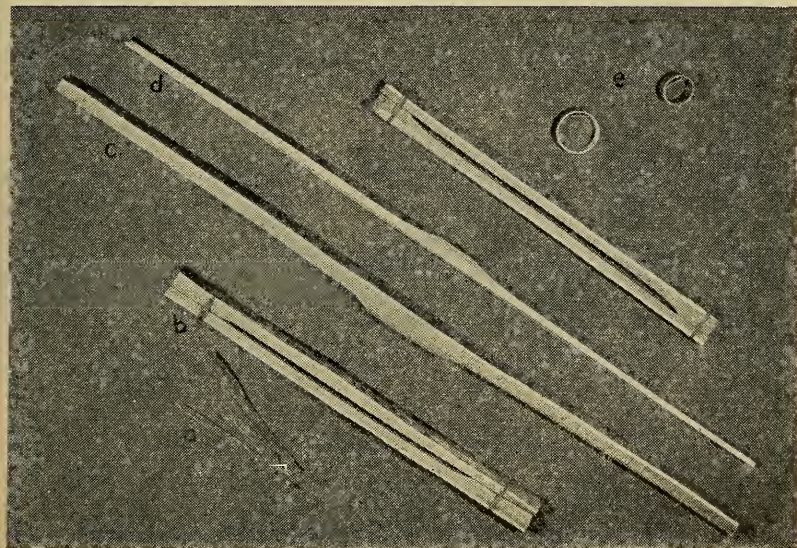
Materials used in construction of bows: (a) leather grip covering, (b) new billets, (c) roughed-out yew stave, (d) yew stave ready for final tillering and finishing, (e) rolls of fortisan backing for bows. (*Photograph by The Ballard Studio, Detroit. Courtesy of Fred Bear.*)
